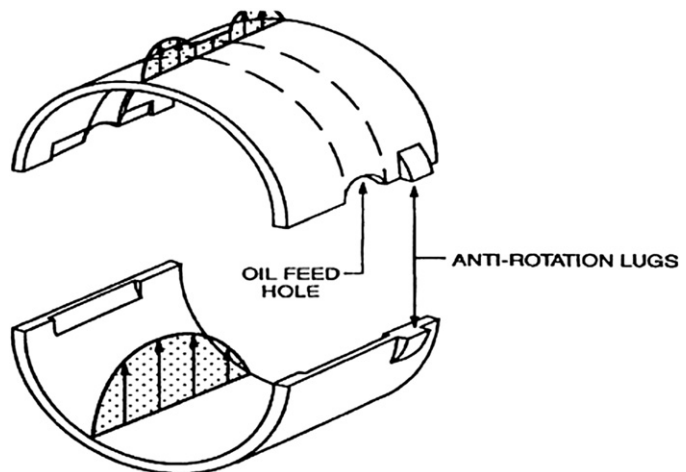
• Straight sleeve bearing liner (Courtesy of Elliott Co.)
